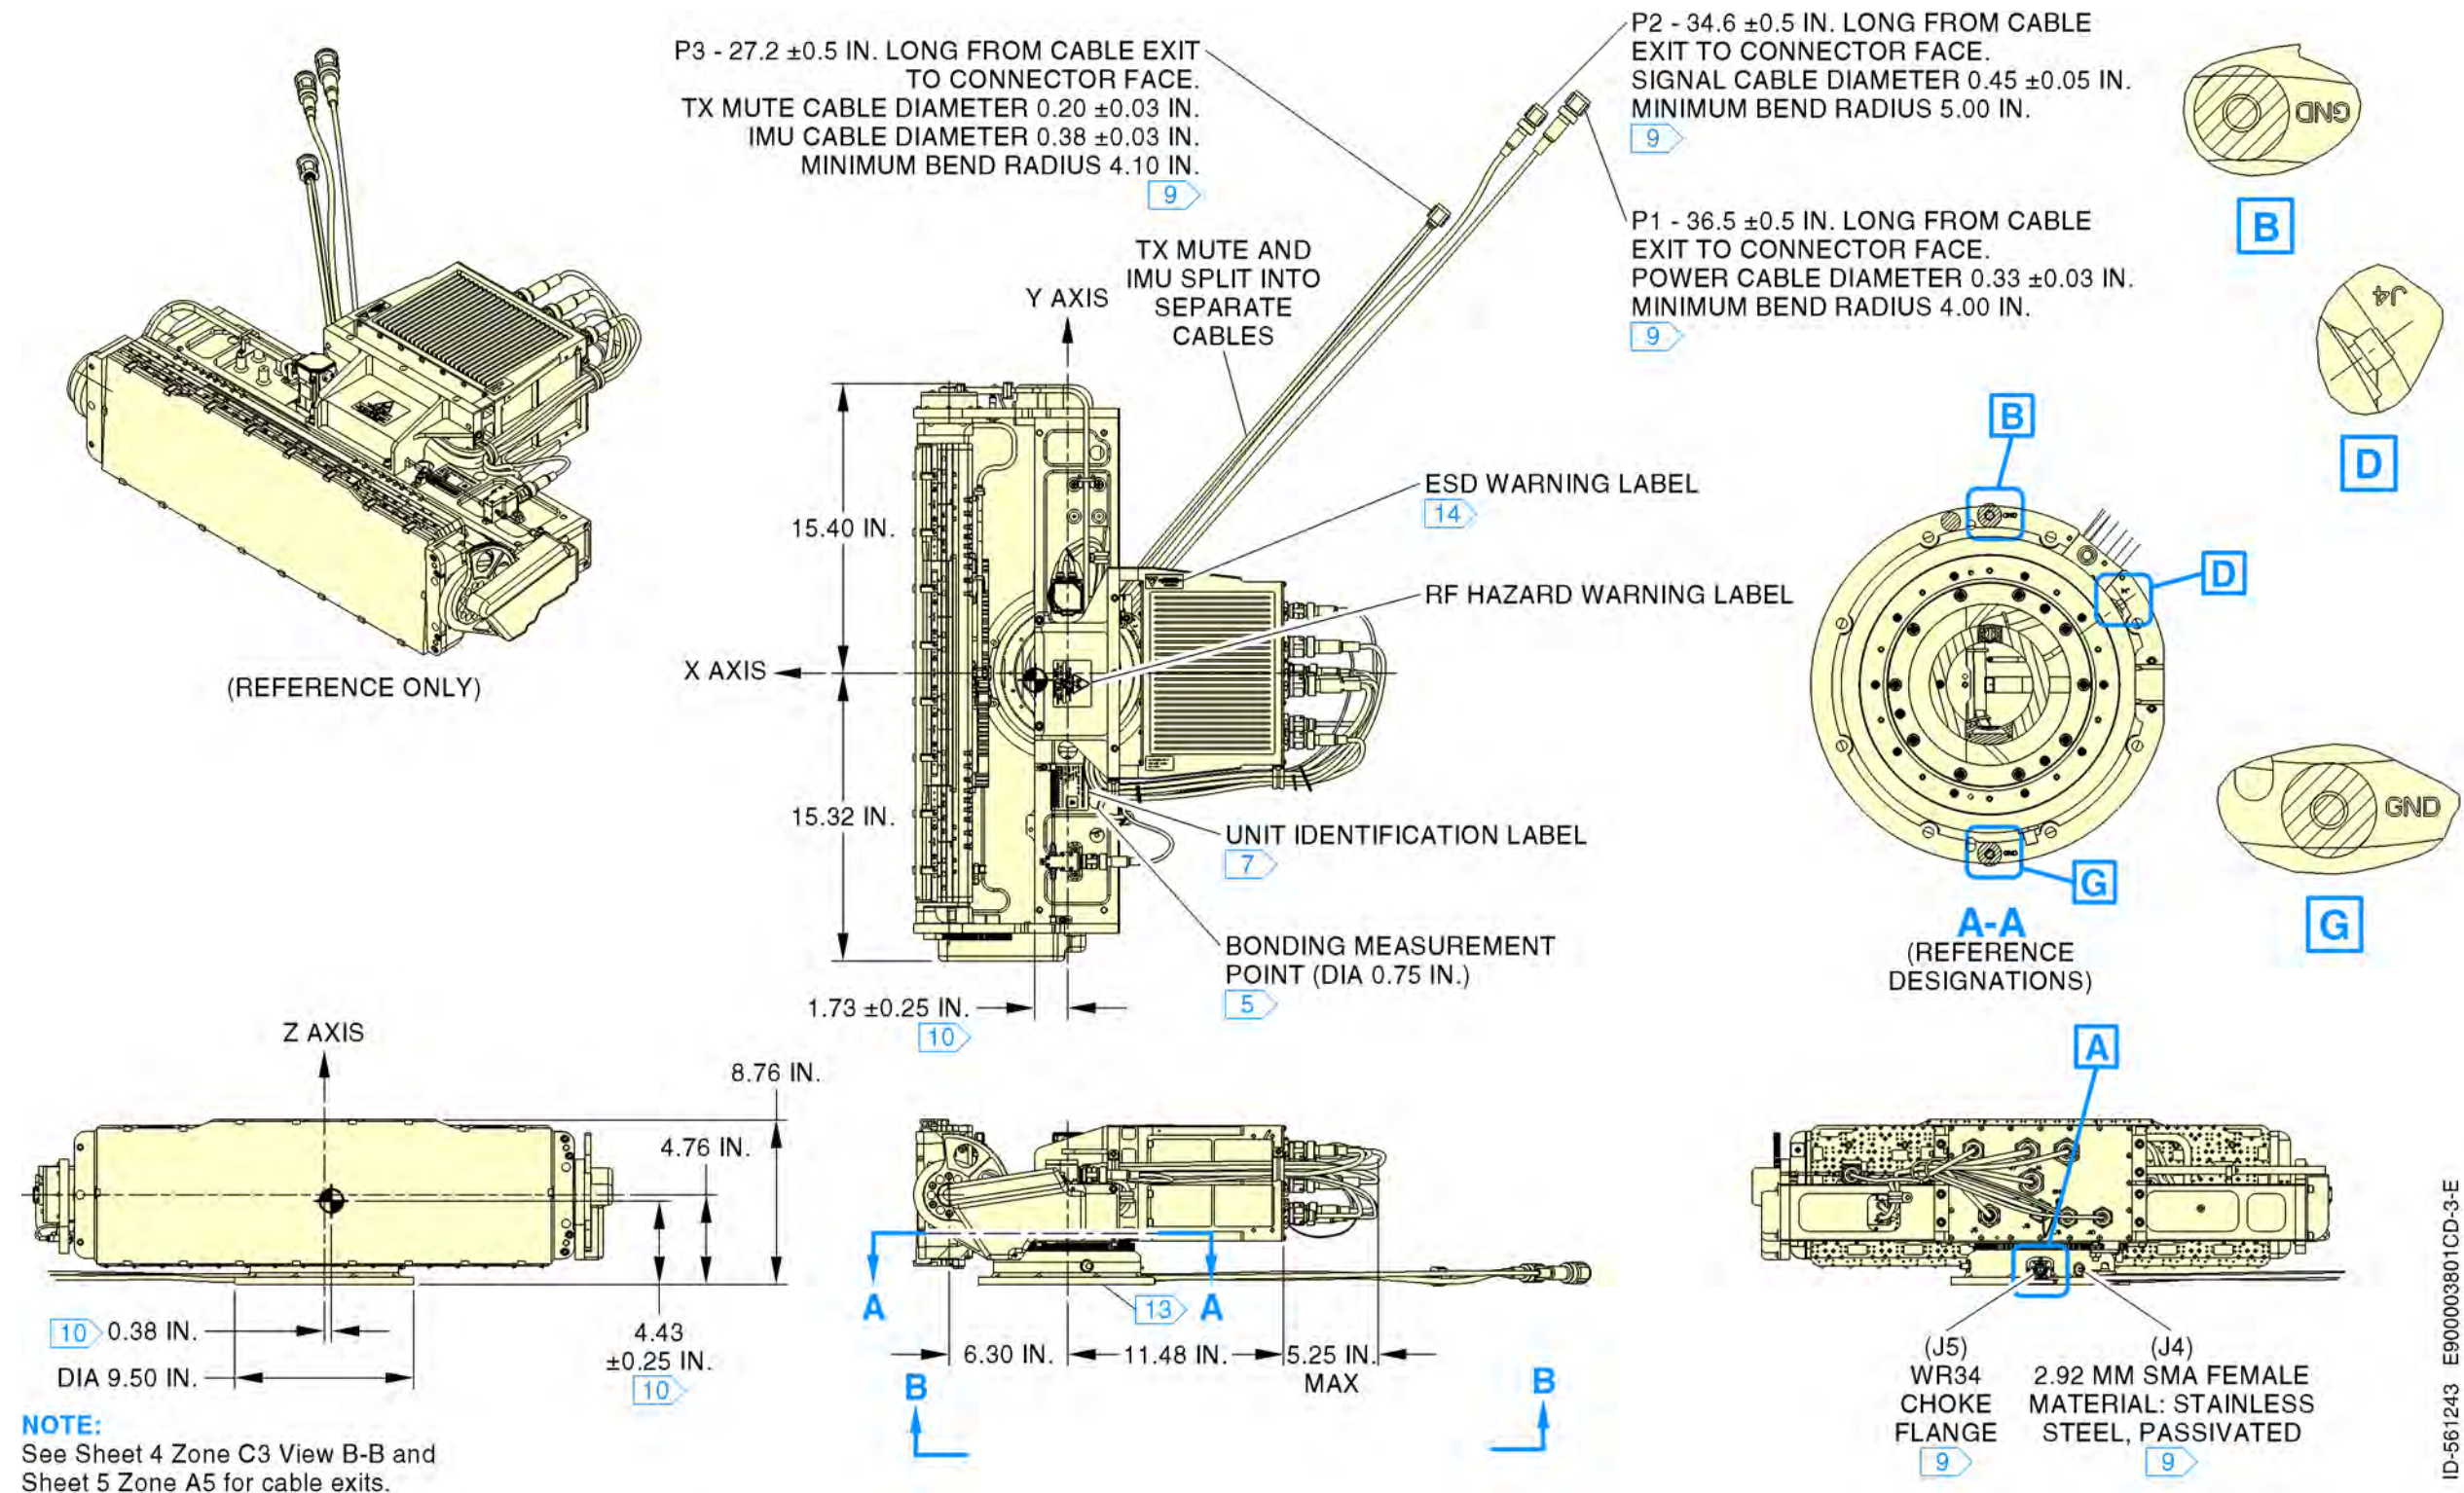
FMA Outline and Installation Drawing (Sheet 3 of 12)
